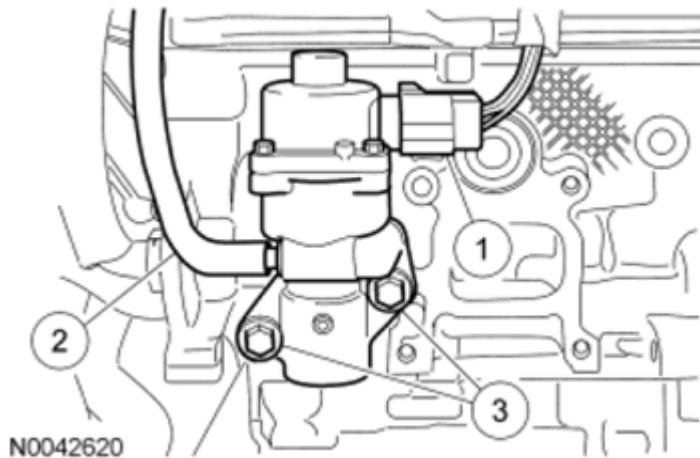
Identifying Electrical Connector, Coolant Hose And EGR Valve Bolts
